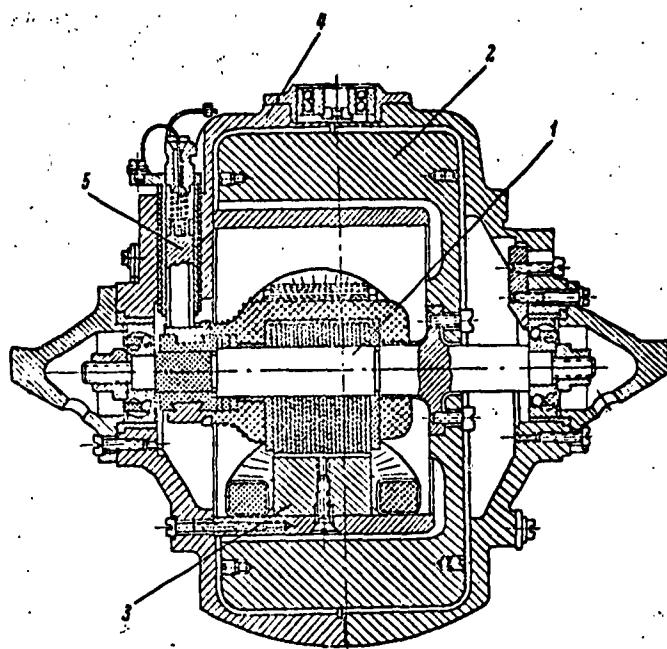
Direct-current gyromotor. 1) Rotor with winding; 2) flywheel; 3) stator with coils; 4) gyroscope housing; 5) brush.
